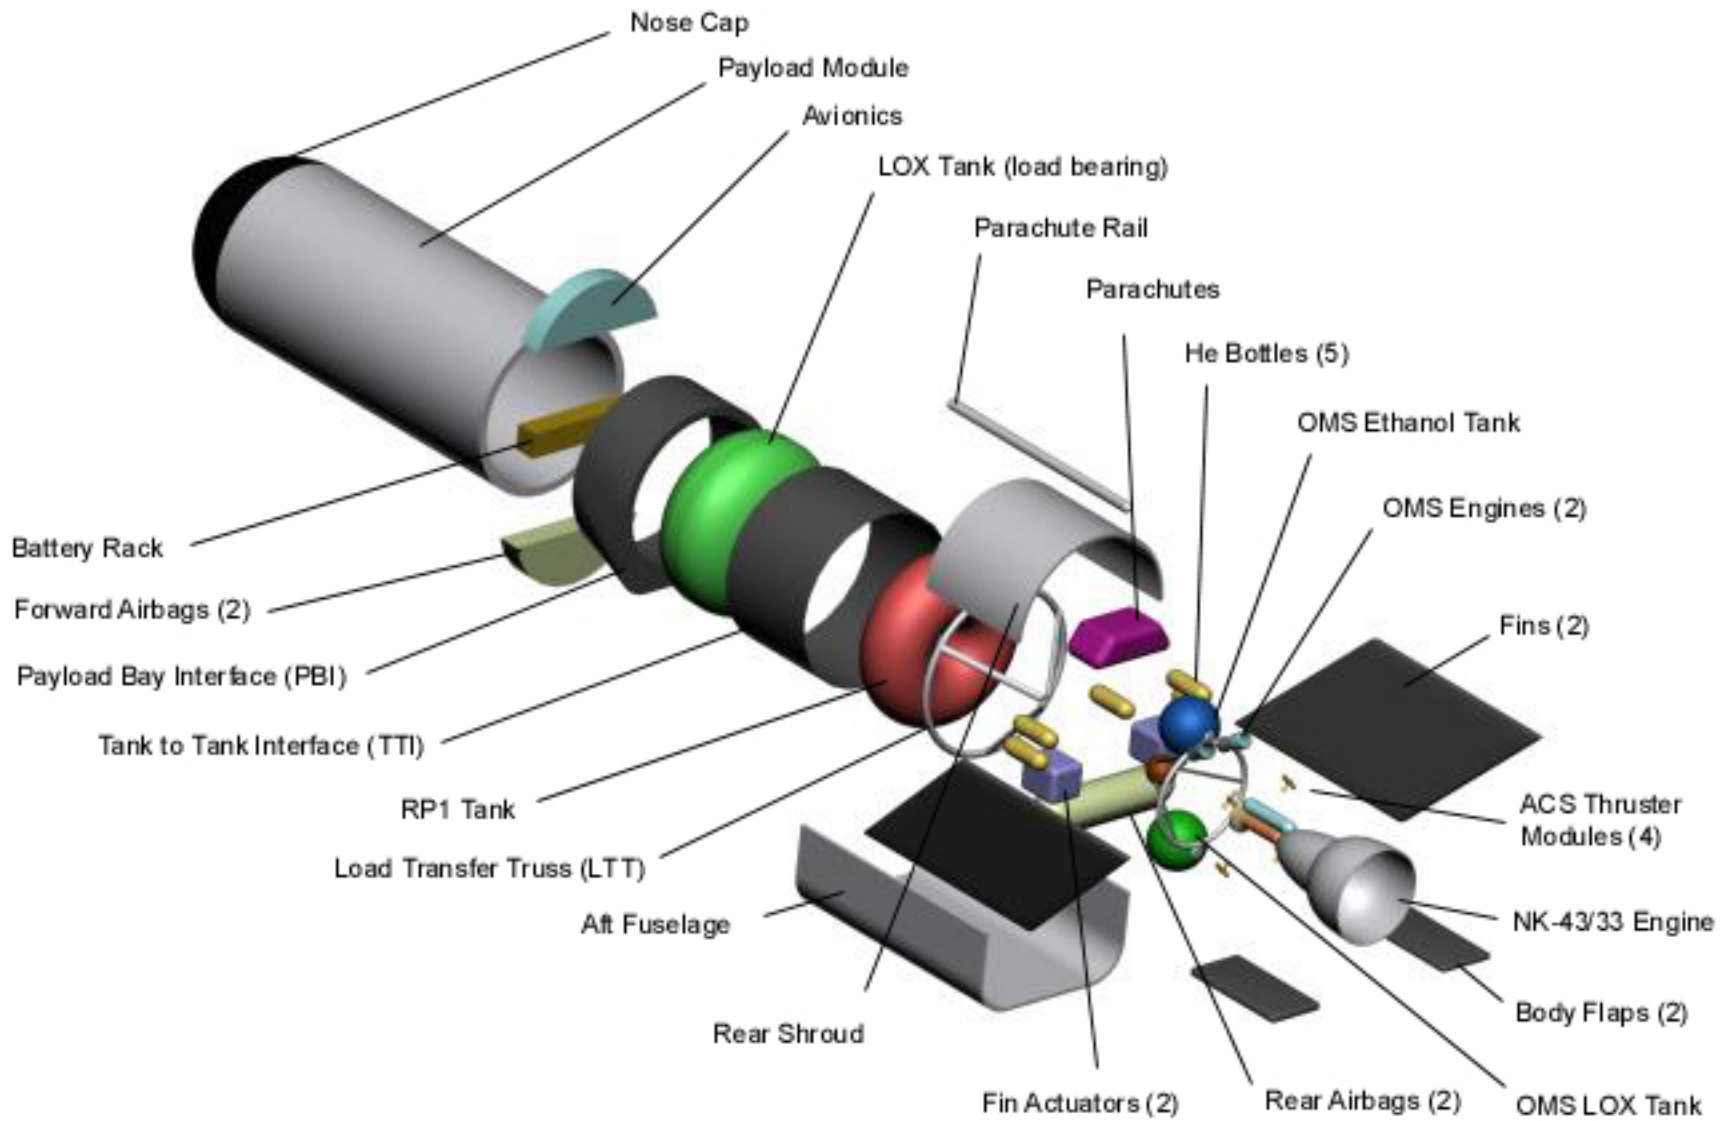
Exploded view of the K2X OV identifying sub-components and their nomenclature.
